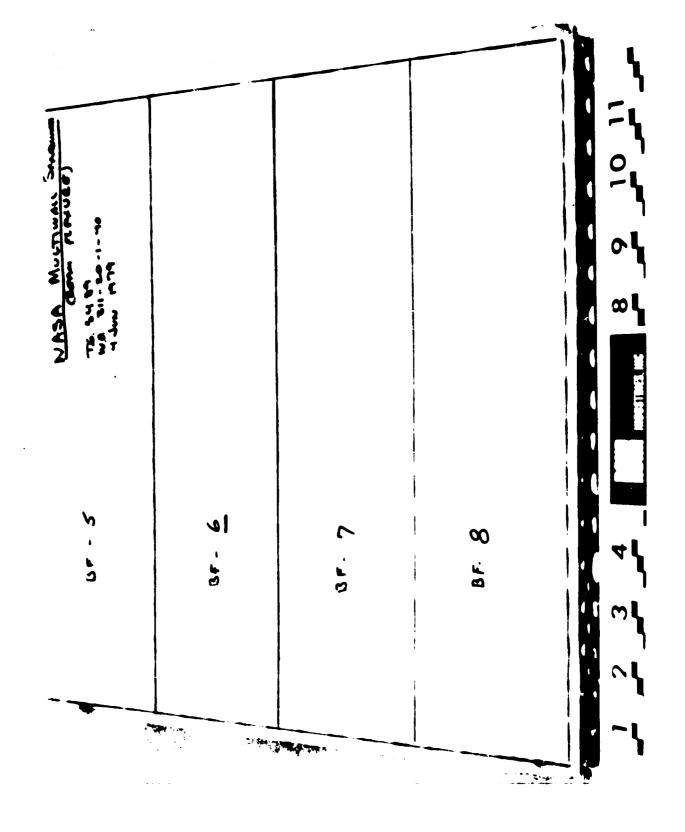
Flatwise Tension Test Specimen Layout for Cutting Beam Flexure Test Specimus
